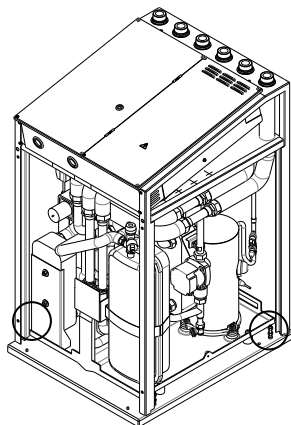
Removing the screws fastening the heat pump to the pallet
